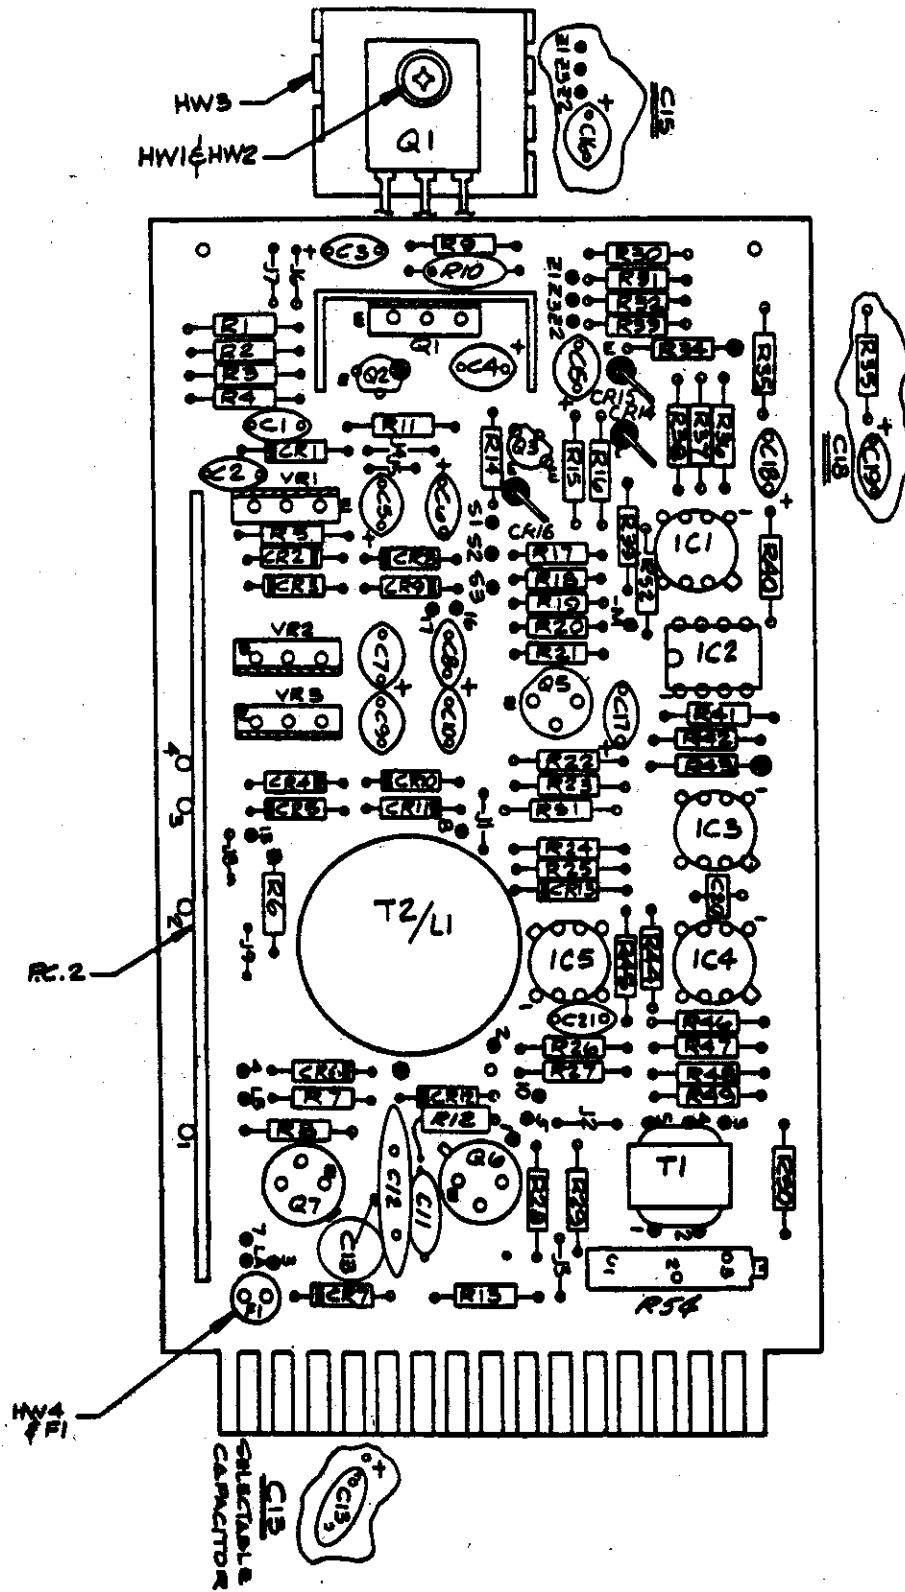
Printed Circuit Board (PC1) Assembly for Plug-In FDT Transmitter
